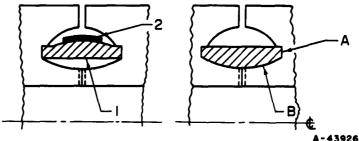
EXTERNAL EXPLOSIVE SEAL
